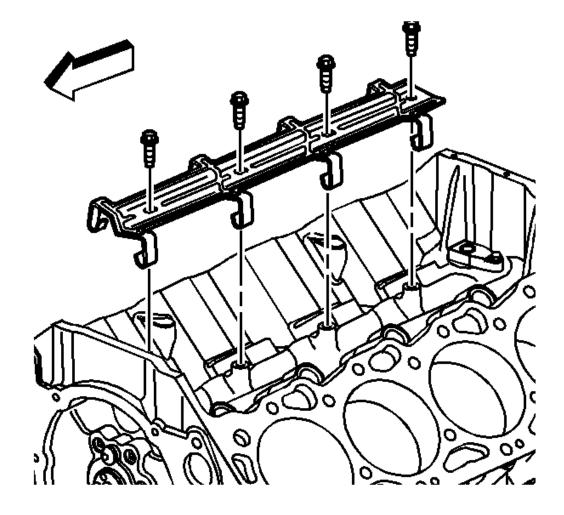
View Of Valve Lifter Guide Retainer & Bolts Courtesy of GENERAL MOTORS CORP.
